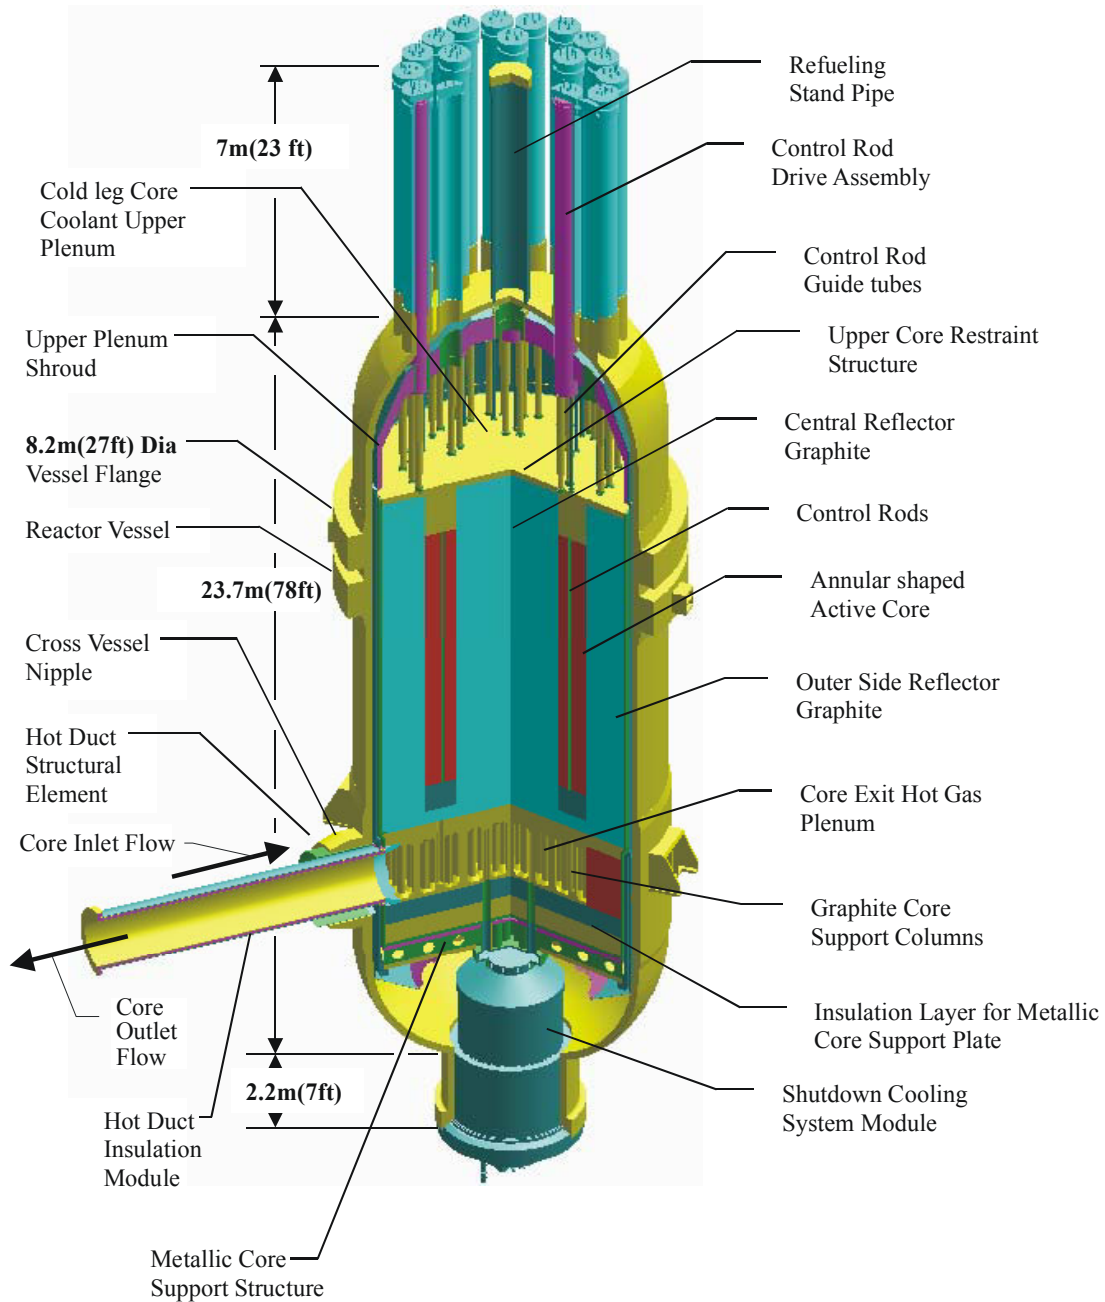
GT-MHR reactor system cutaway showing the metallic internals structures, core, control rod guide tubes, and shutdown cooling system.
